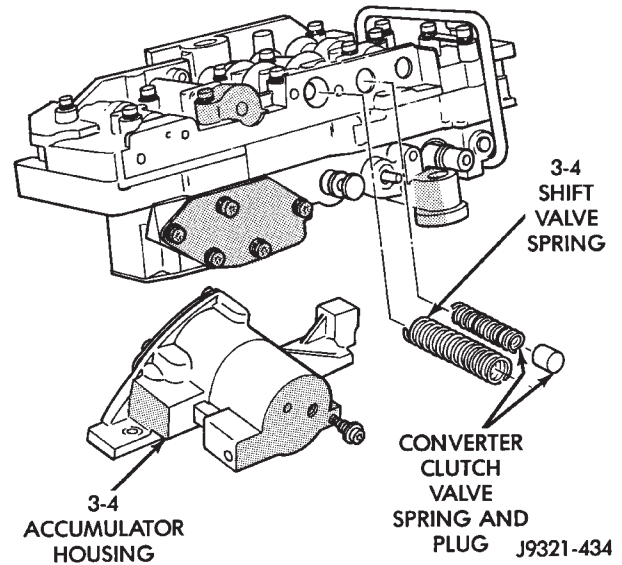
3-4 Accumulator Housing, Valve Springs And Plug Removal
